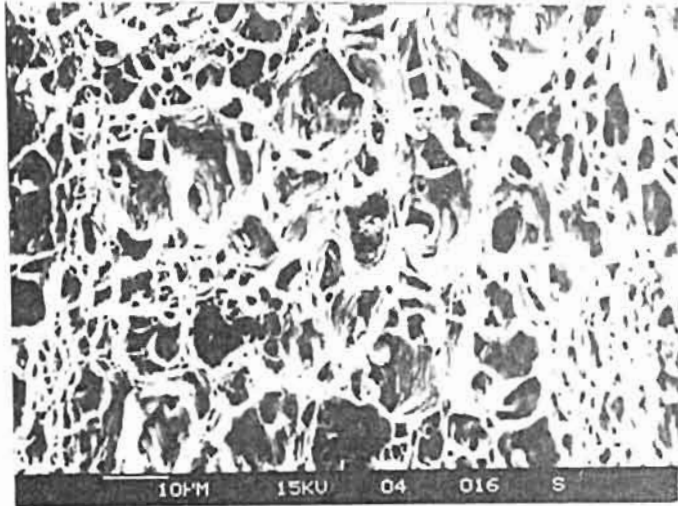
Fractograph of tensile fracture of sample at Fig.65. Reveals formation of microvoids and deep dimples typical of ductile fracture.
